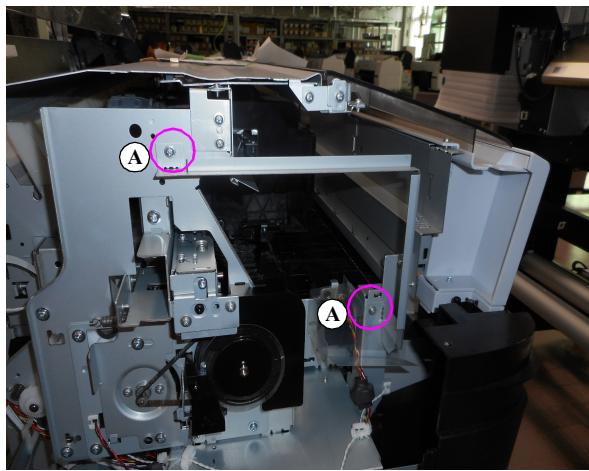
Removing the CUTTER MOTOR ASSY (1)
